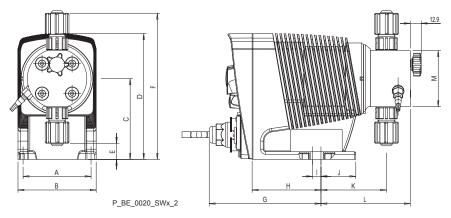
Dimension drawing Beta b BT4b/BT5b, material version PP - dimensions in mm
